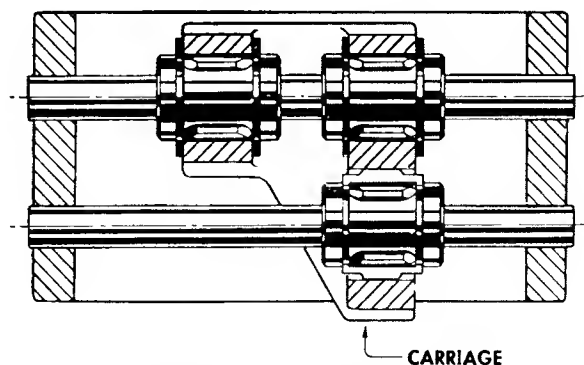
PARALLEL SHAFTS WITH A RESILIENT MOUNTED BALL BUSHING
